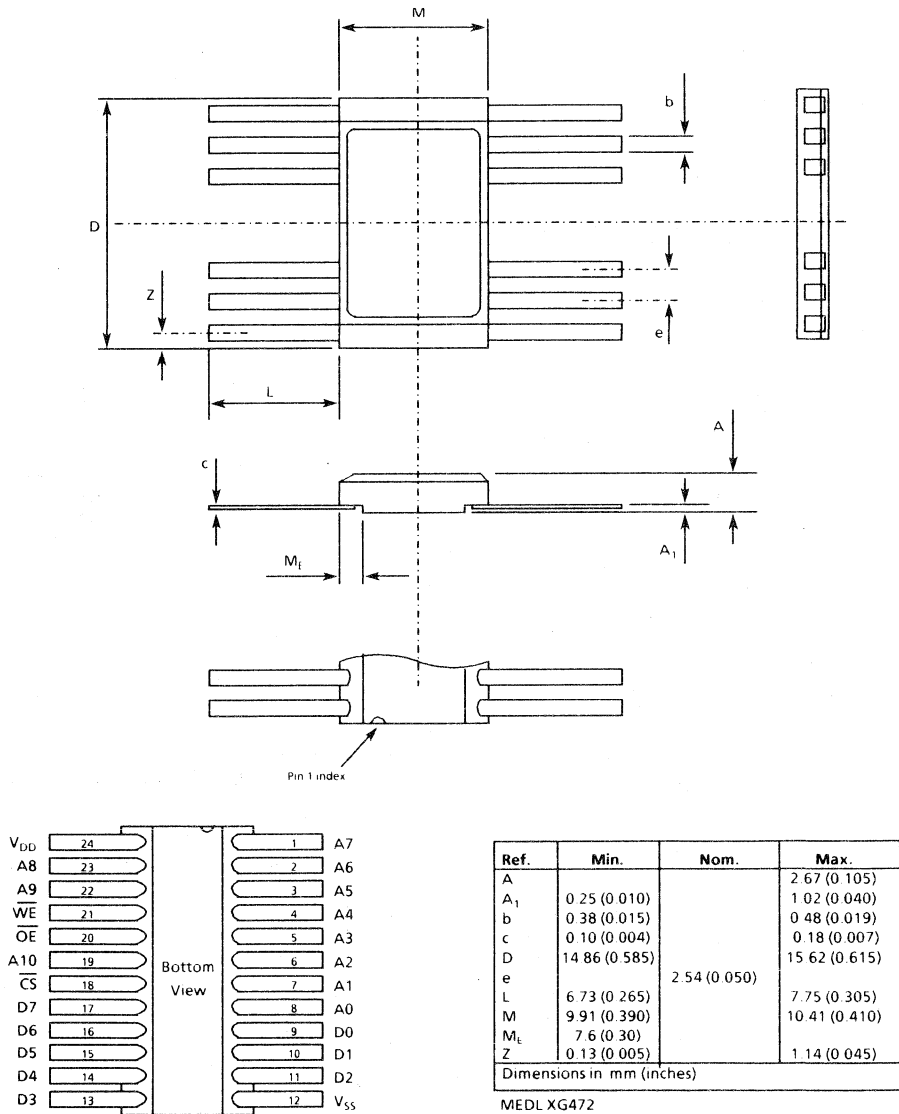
24-lead Ceramic Flatpack (solder seal) - Package style F
